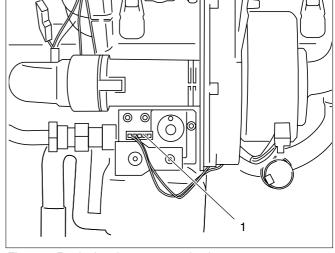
Replacing the gas control valve (e.g. HONEYWELL gas control valve)
